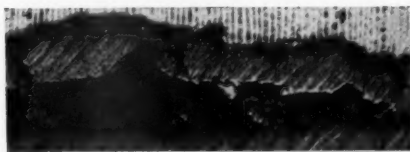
Same wire as Fig. 21, wrapped on mandrel 3 times diameter of wire. Coating flaking.
